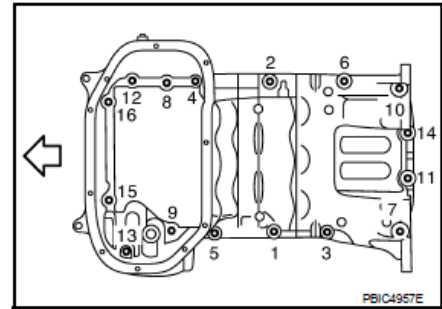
Identifying Oil Pan Mounting Bolts Tightening Sequence
